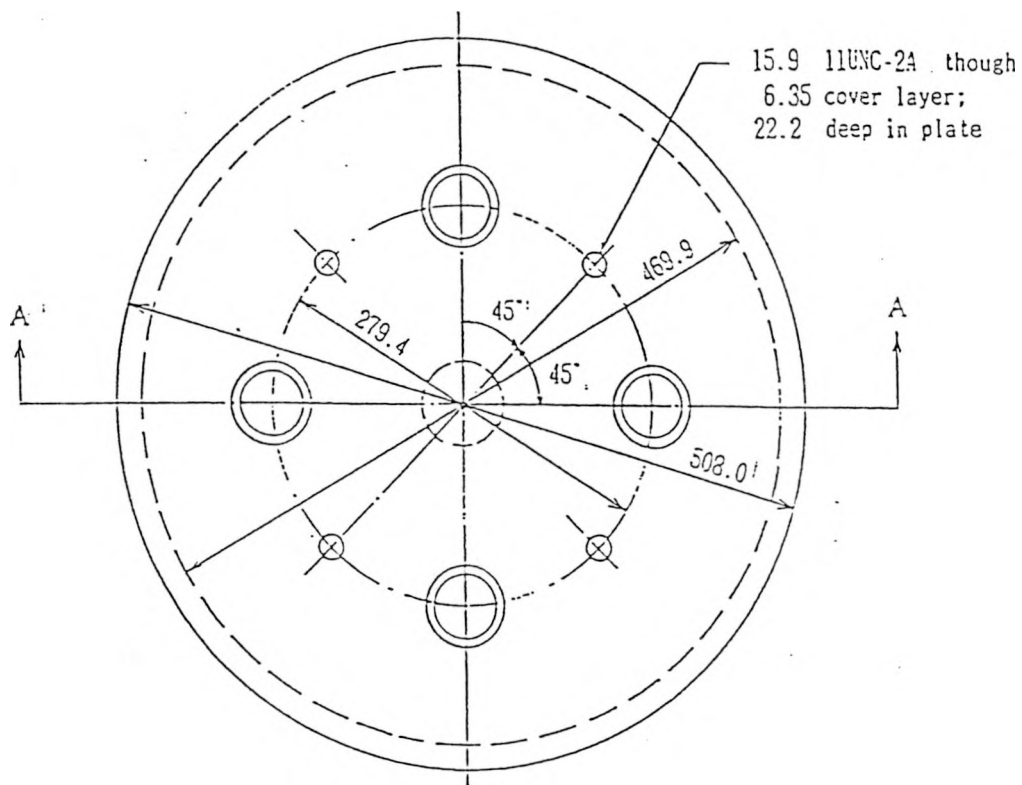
Bearing Configuration and Dimensions (unit: mm)
